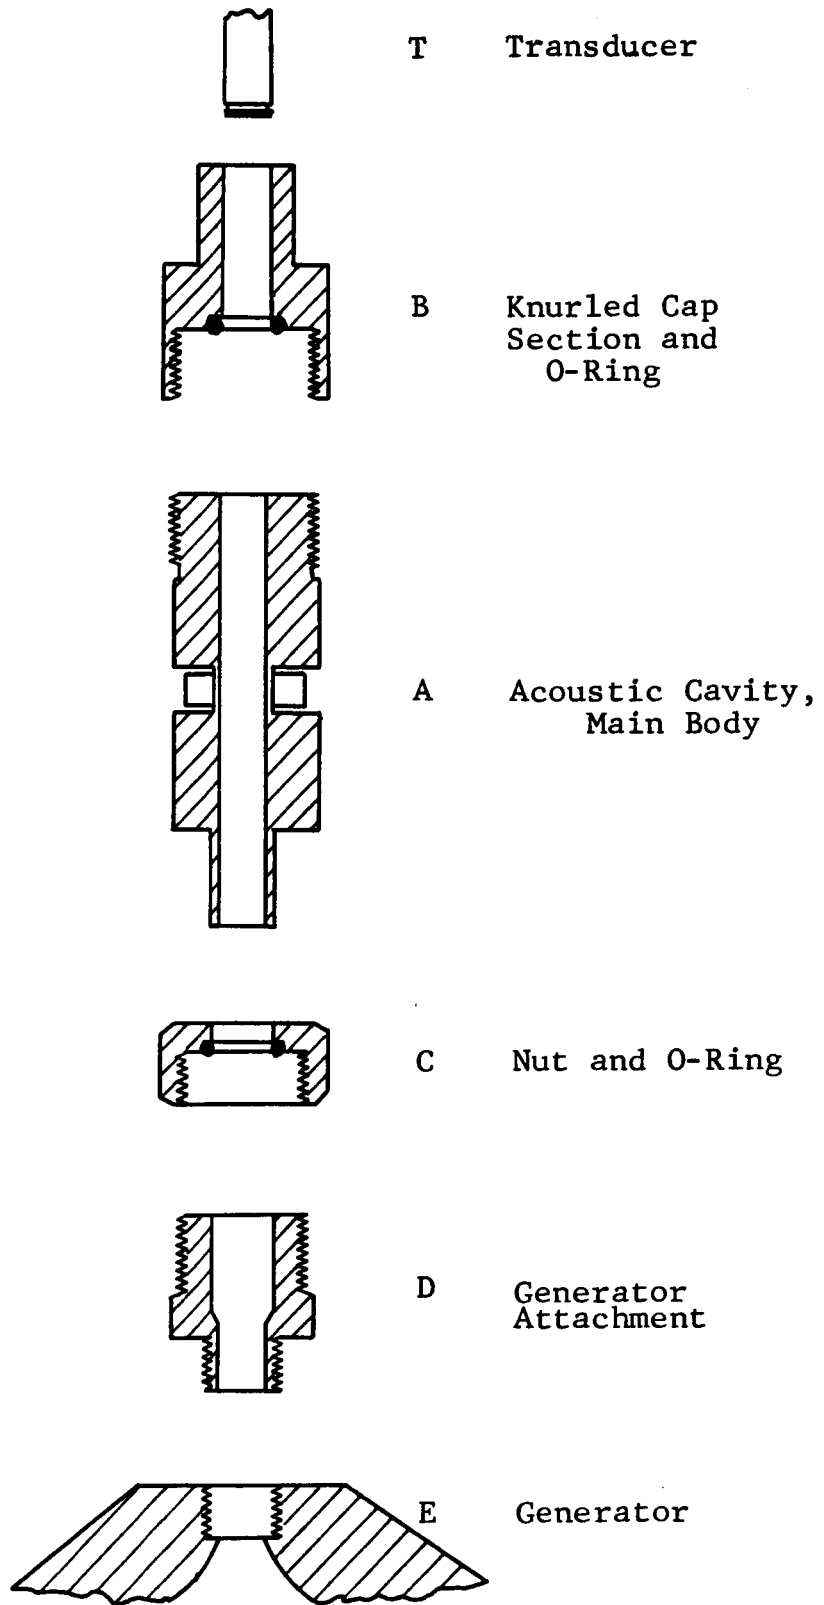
Exploded View of Acoustic Cavity Assembly.
